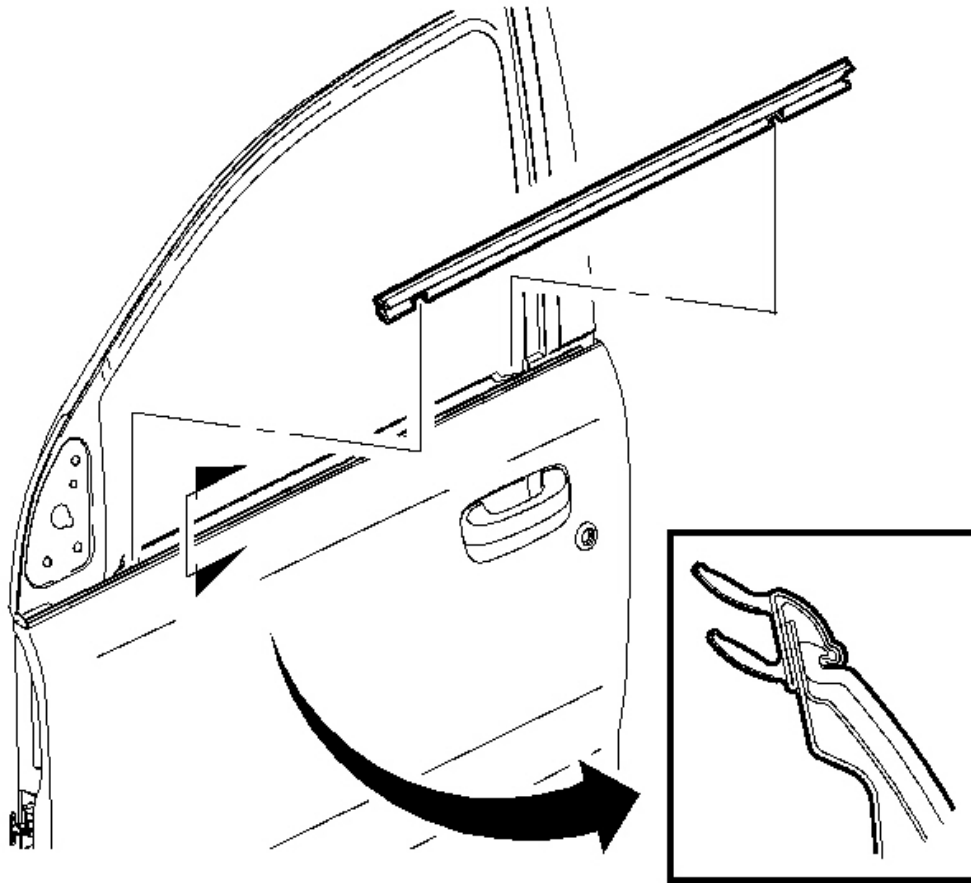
View Of Front Door Window Outer Belt Sealing Strip
